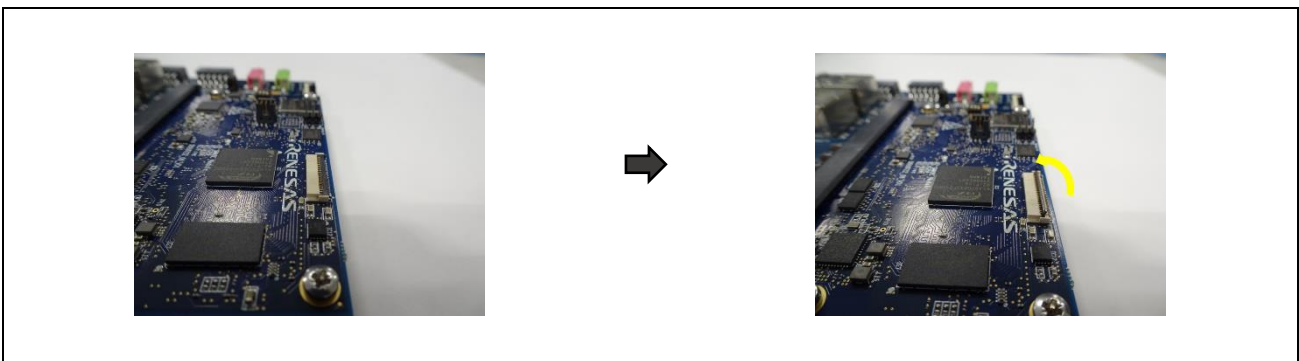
How to Install the 50-mm FPC Cable (1)
